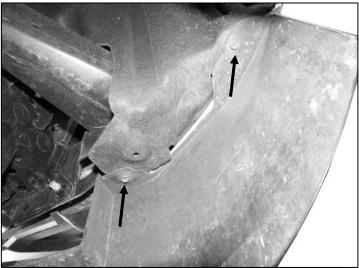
Starting on Passenger Side wheel well, remove three screws and two plastic clips to release the liner from the front clip. Pry tool may help with separating liner from front clip. Repeat for Driver side. Be sure to retain all hardware.
